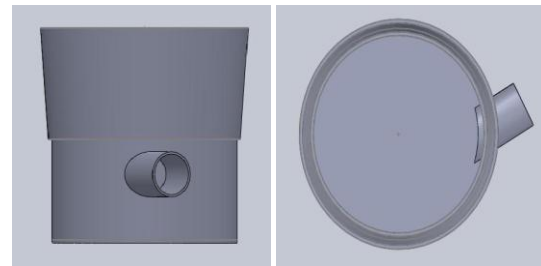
Air Inlet Pipe at 30° Inclined Vertically-Cooling Tower Model
